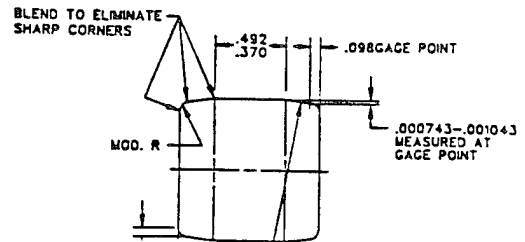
MRC Test Bearing MR315C2 (Sheet 2 of 2)
